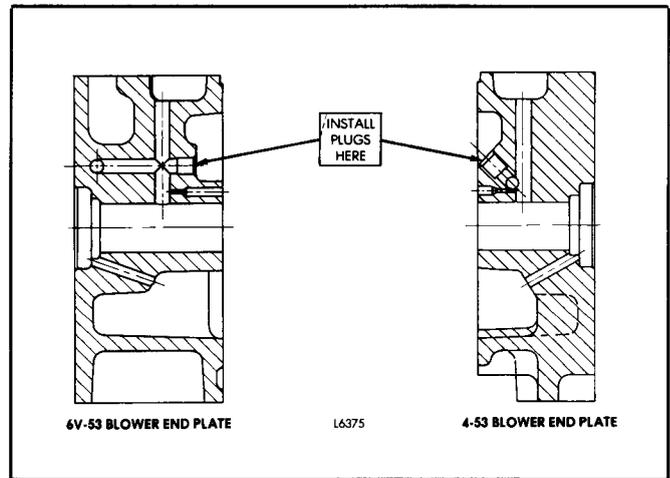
Location of Holes to be Plugged - Blower End Plates
